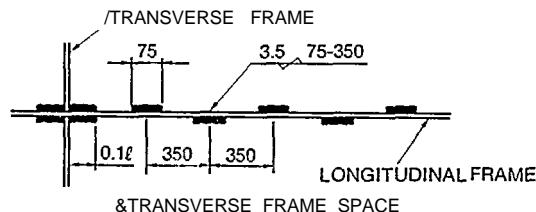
SHORT INTERMITTENT WELDING
